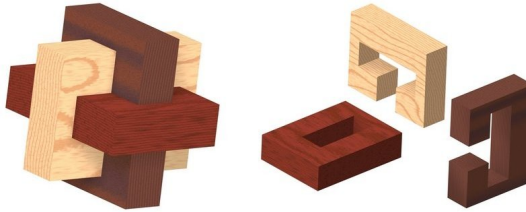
Knot-Burr puzzle assembly and parts (source: www.craftsmanspace.com).
